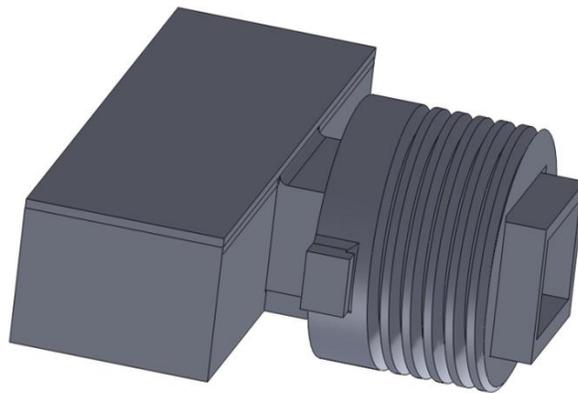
SolidWorks assembly of second prototype slip detection casing.
